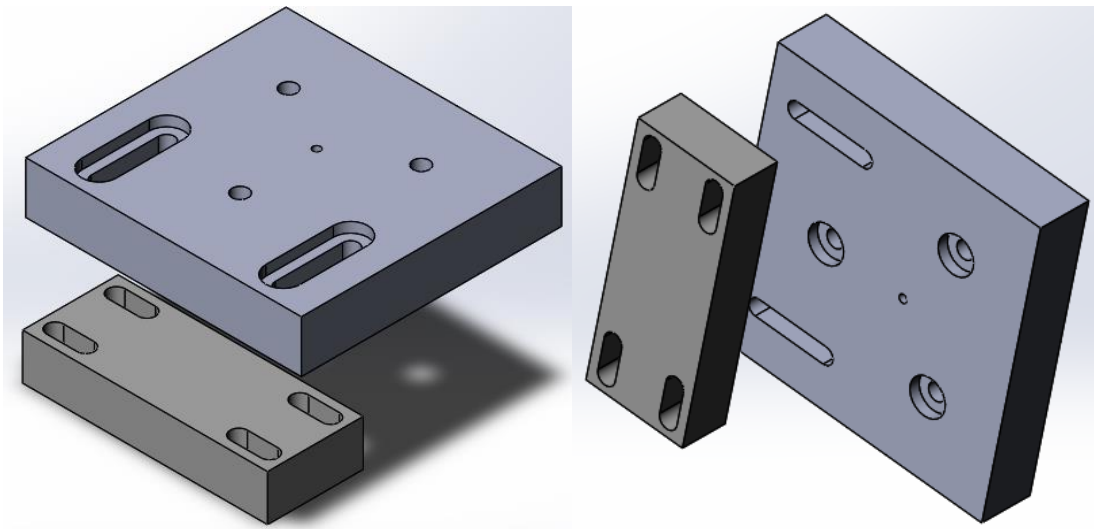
Aluminum plates designed to connect large VCA to table breadboard.
